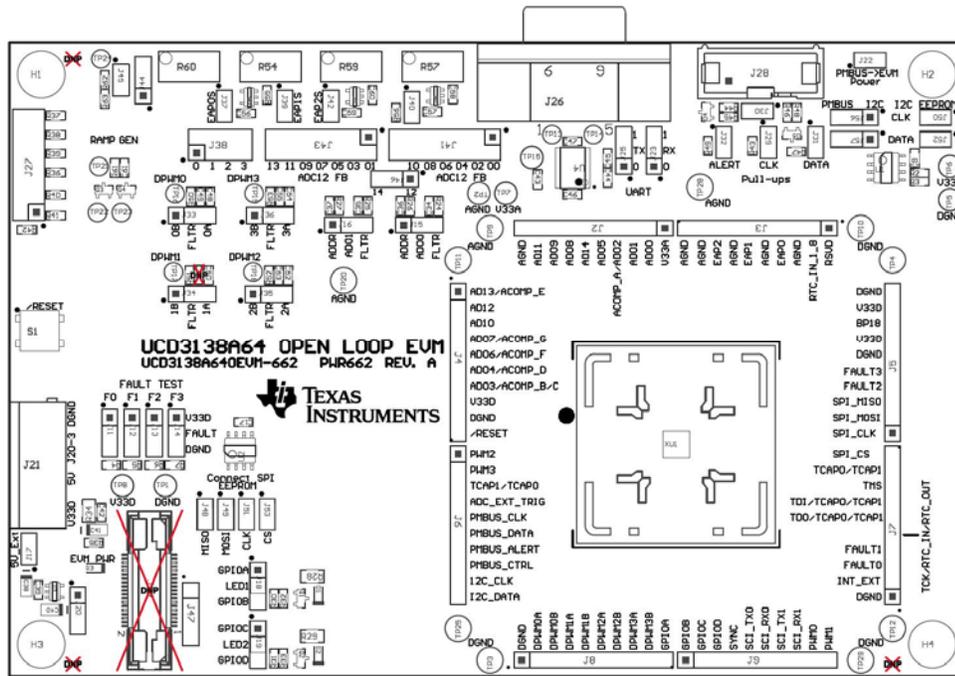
UCD3138A64OEVM-662 Top Layer Assembly Drawing (Top view)
